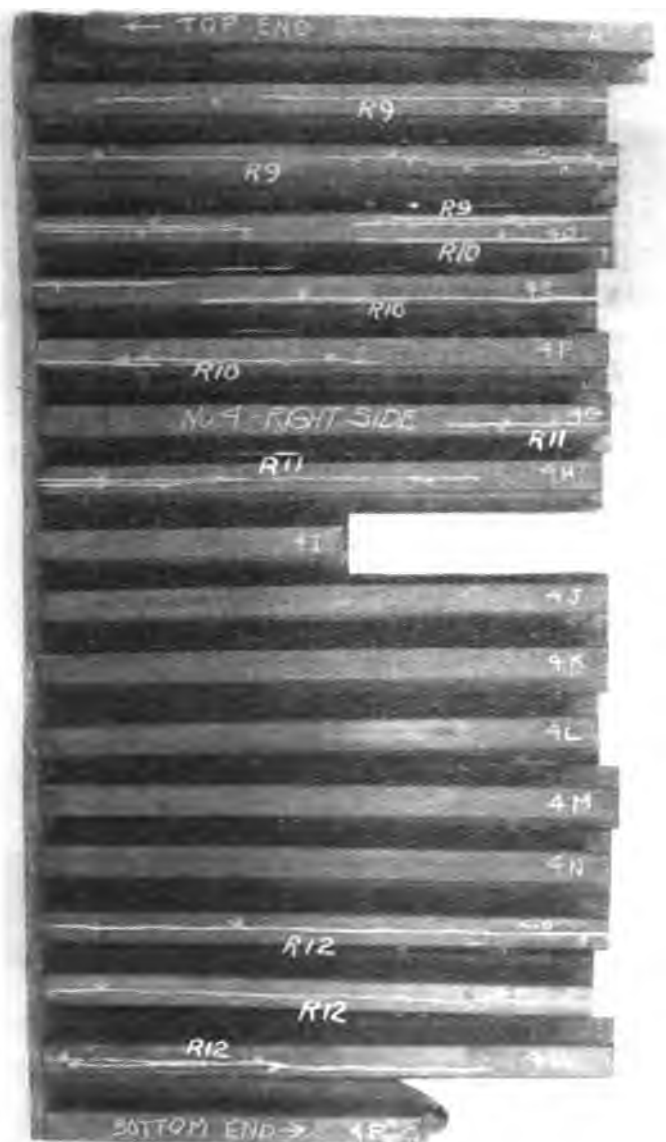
RIGHT SIDE OF BOTTOM QUARTER OF INGOT ROLLED INTO RAIL, MAKING TOP SIDE OF RAIL. PICKLED.
